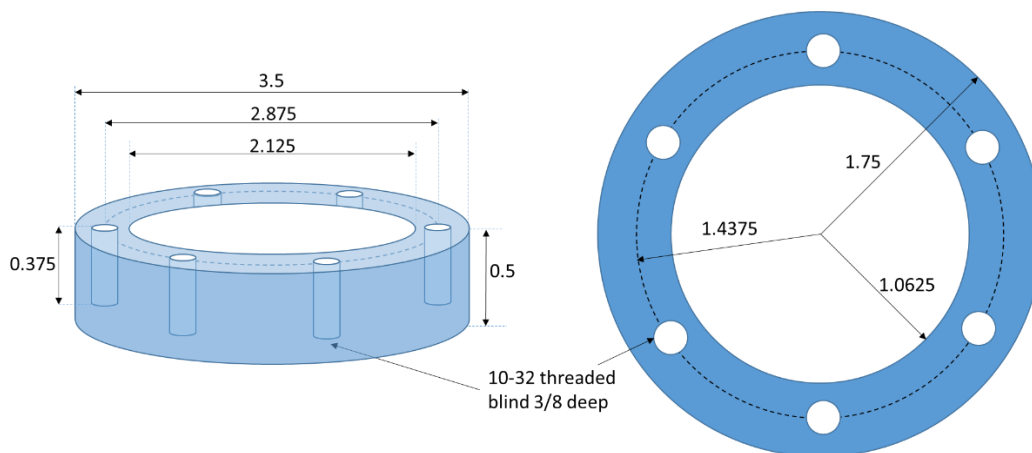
Schematic drawing of adaptor for mounting WR-42 bulkhead waveguide in a piping Tee
